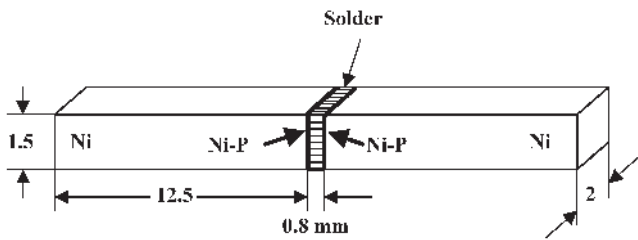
Dimensions of the tensile testing specimen used in this study. The dimensions are in millimeters.
